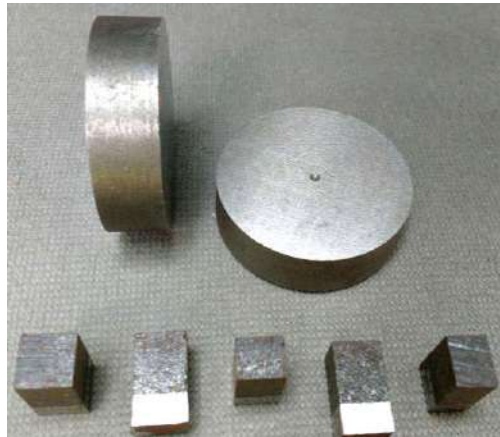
Friction pads $14 \times 14 \times 20$ mm (cut from brake pads) and gray cast iron blanks ($\phi 70 \times 15$ mm discs) for the manufacture of brake discs
